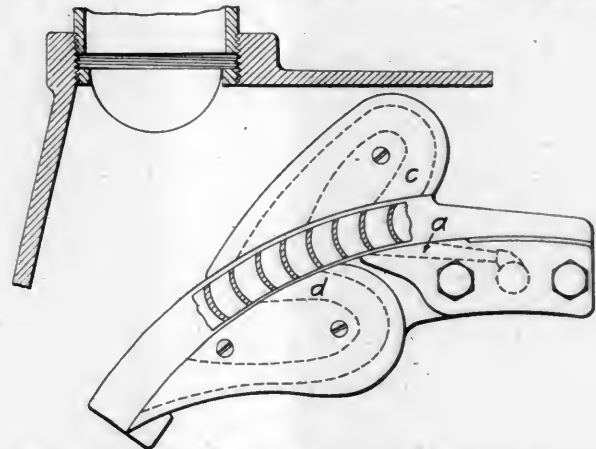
Enlarged View of Steam Nozzle and Reversing Chamber of Pyle-National Turbine
